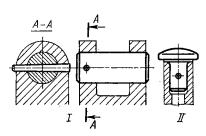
Fastening gear wheel on shaft with cylindrical pins
